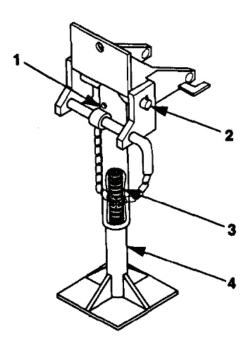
Rear Leveling-Support Jack Lubrication Points.
